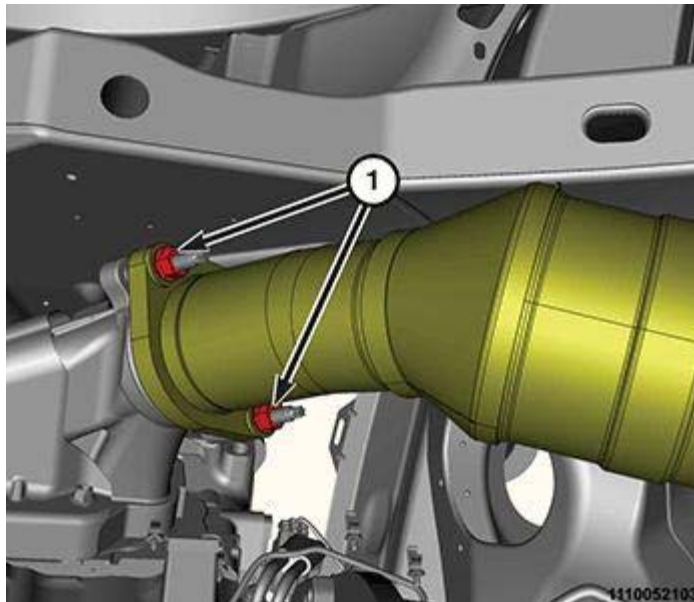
Catalytic Converter To Manifold Flange Nuts
